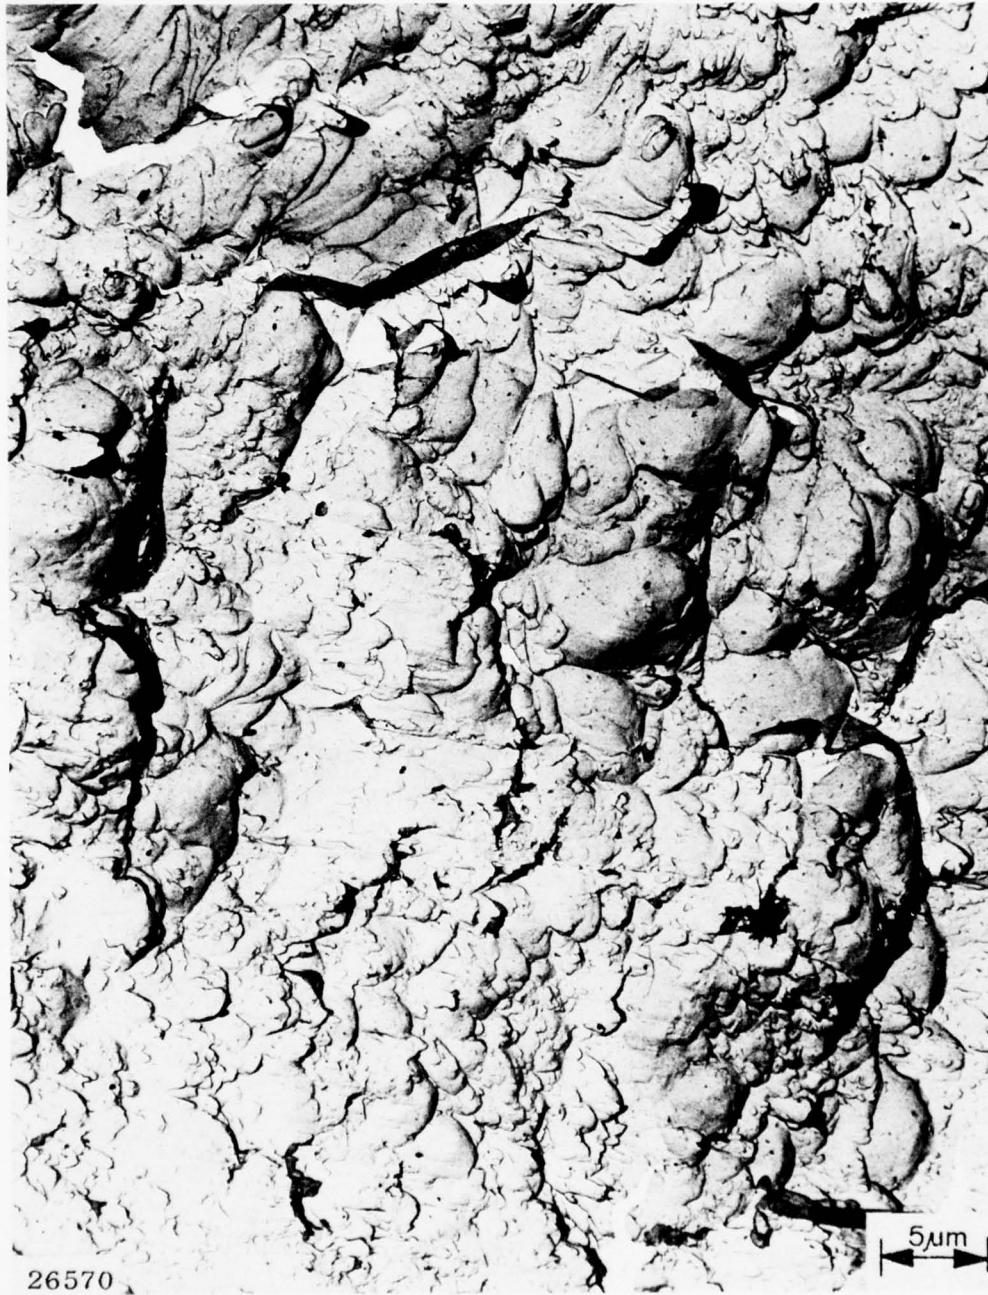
Microvoid coalescence in weld metal in midthickness region of EB weld joint fracture of 12.7-mm-thick HY-130 DT specimen. Not preheated.
